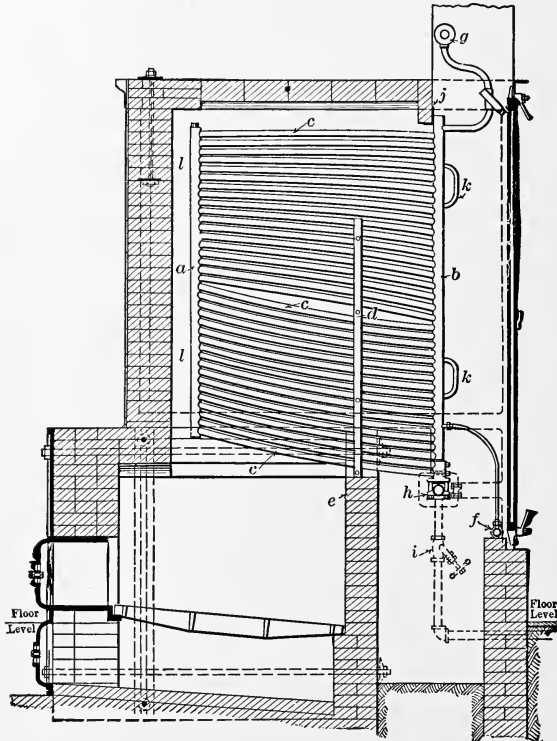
Winslow "Safety High-pressure" Boiler and Hand-fired Setting.
